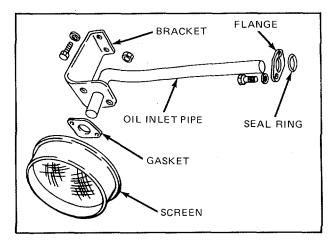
Oil Pump Inlet Pipe and Screen Details and Relative Location of Parts (In-Line Engine)
